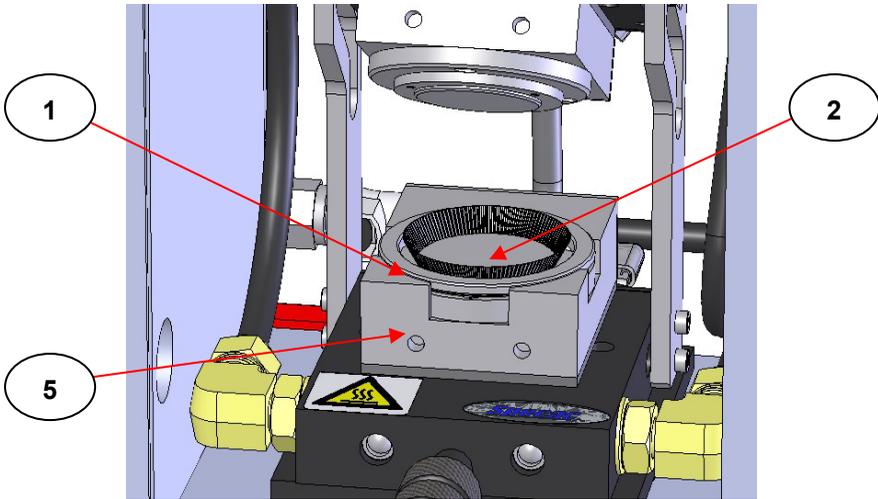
Lower Aluminium Sample Cup Positioned in Lower Heated Pressing Surface Assembly
